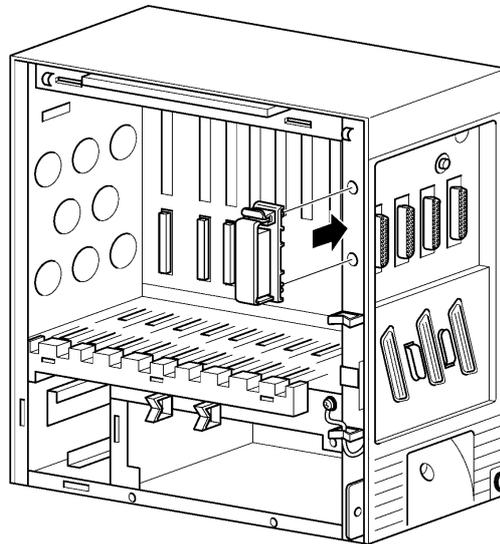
Mounting the Cable Clamp on the KSU Frame
